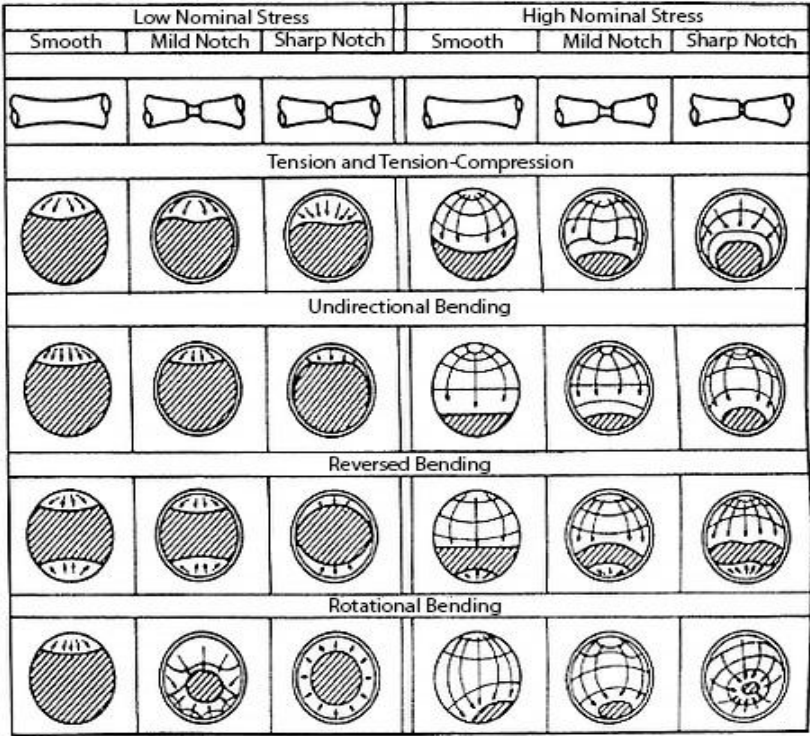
Different surface morphologies due to fatigue failure for axial and bending loading (rearranged) [42]
